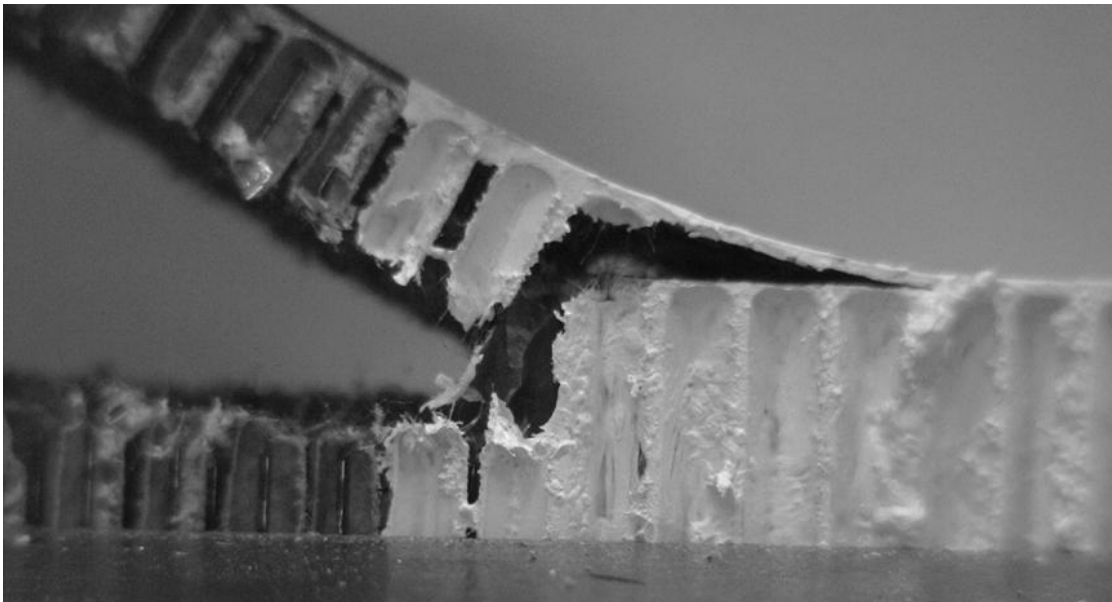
Debond at center of core of un-tabbed thin facesheet coupon migrating to facesheet/core interface region
